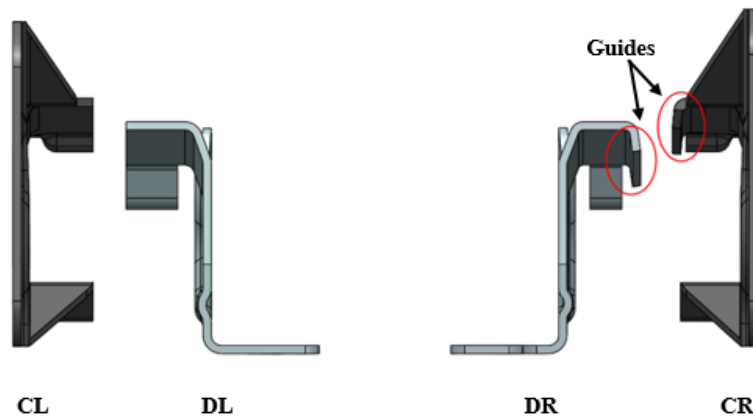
Side view of the four plates, showing the guides on DR and CR.
